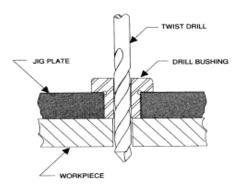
A jigs guiding the tool, in this case the drill bushing
